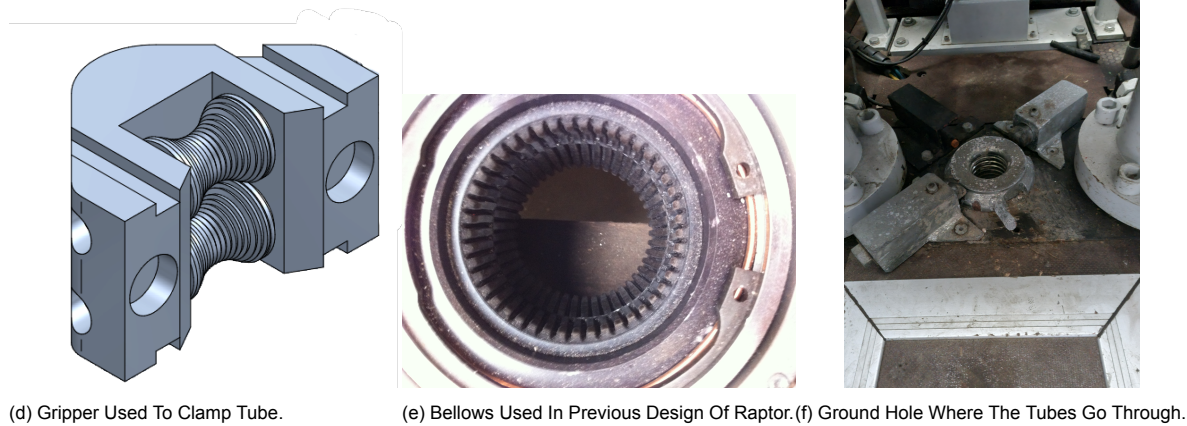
Pictures Of The Different Important Parts Of The Raptor In Combination With Automatic Placement System.
